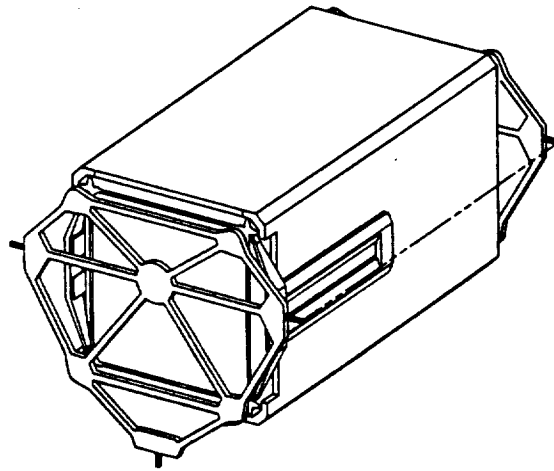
Structural Pallets Used to Attach Packaged Truss to NSTS Payload Bay
